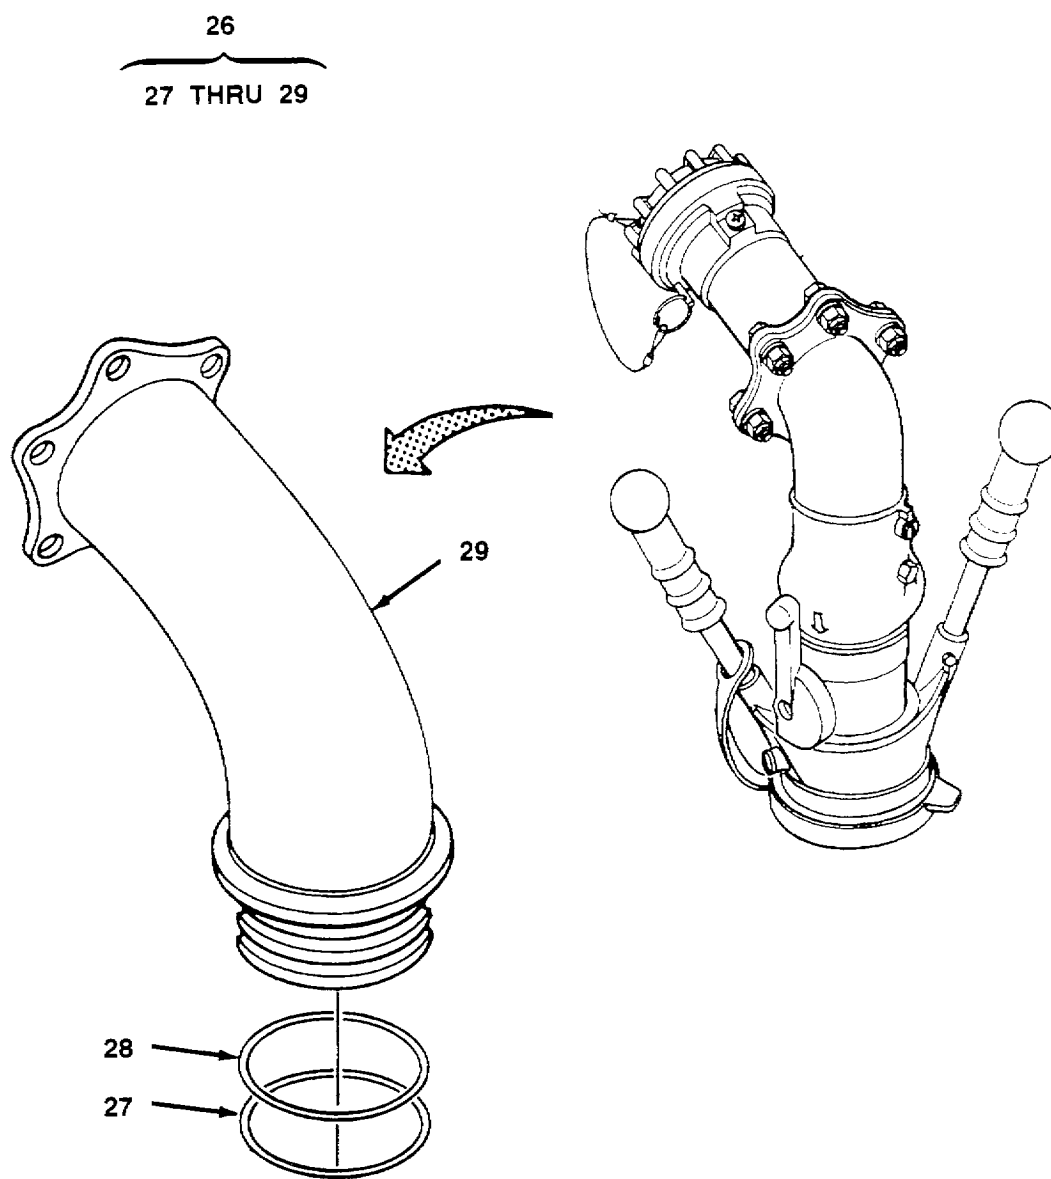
A. Pressure Fueling Nozzle Assembly (HTARS101) (Sheet 3 of 6)
